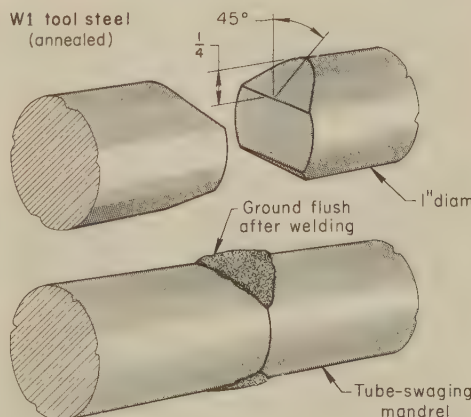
Joint preparation and weld used for lengthening a tube-swaging mandrel (Example 520)
